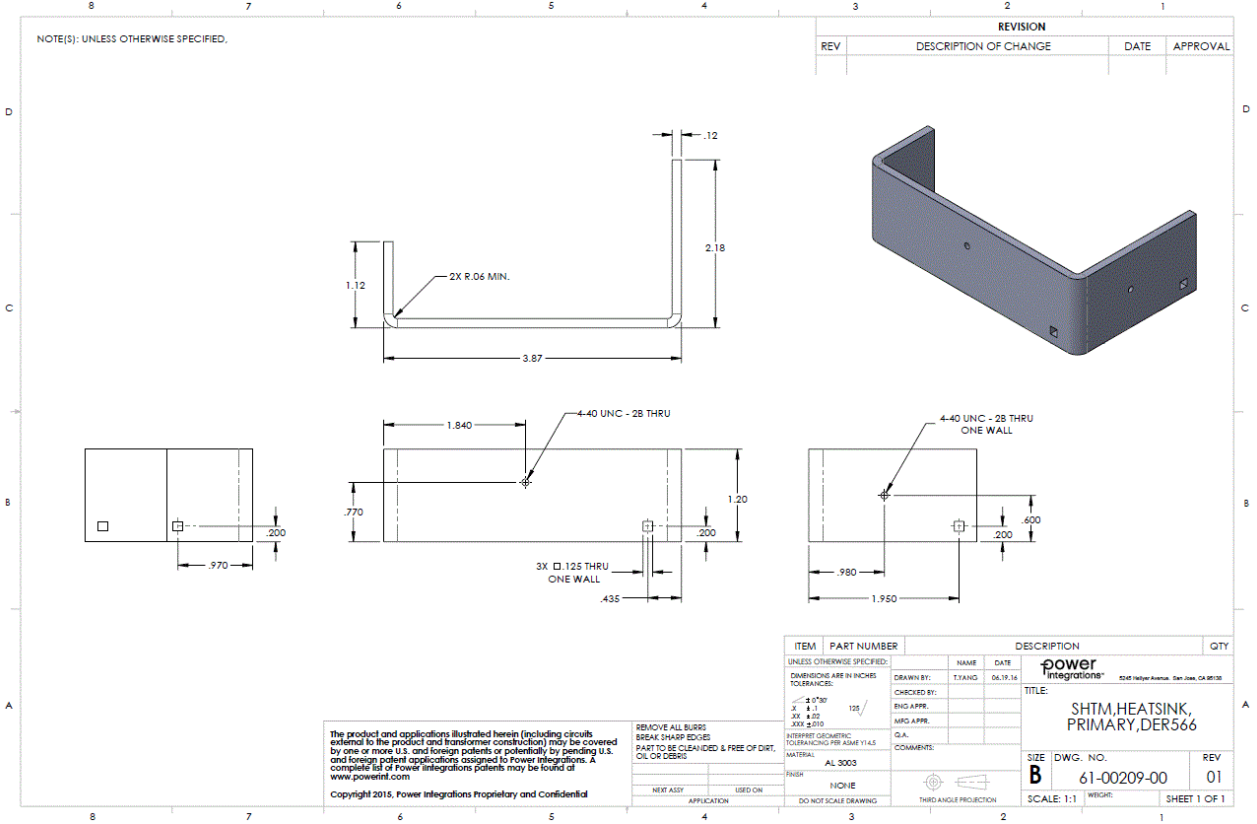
DER-566 Primary Heat Sink Sheet Metal Drawing.
